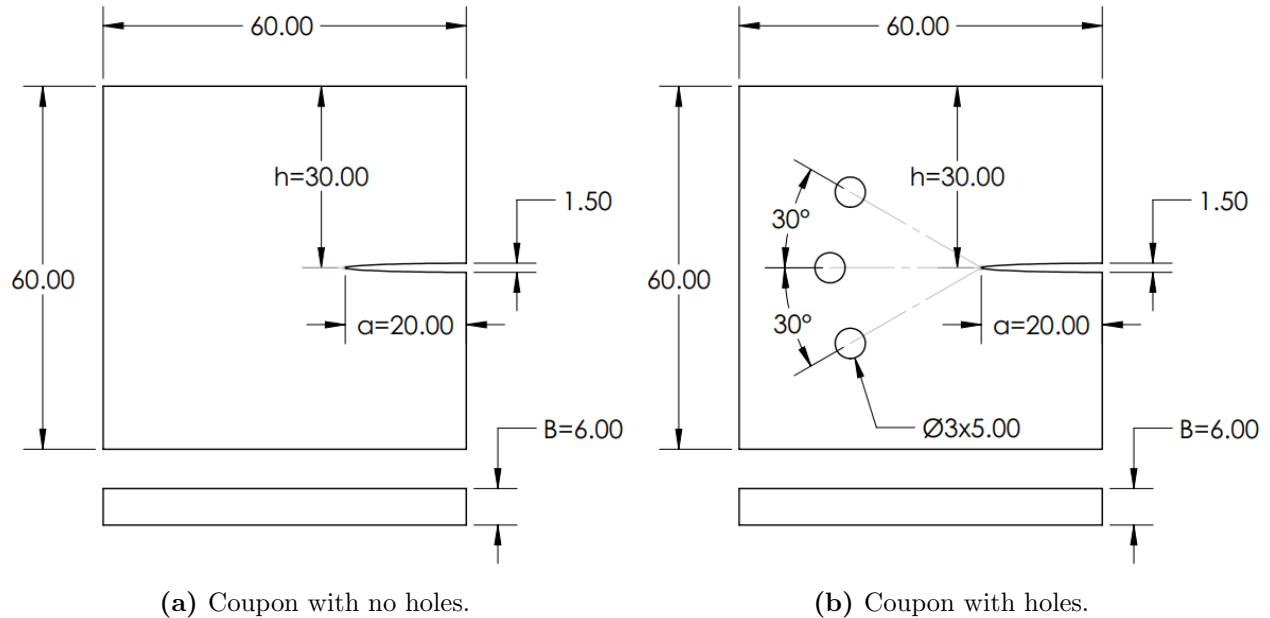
Test coupons with a crack directly printed into the geometry (units in mm). In coupon (b), the holes are all equidistant (20 mm) from the crack tip at angles of -30° , 0° , and 30° .
